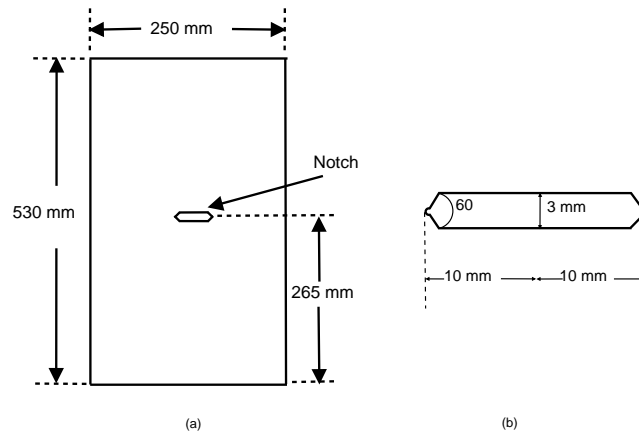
(a) Single edge notch test sample (b) Notch dimensions
